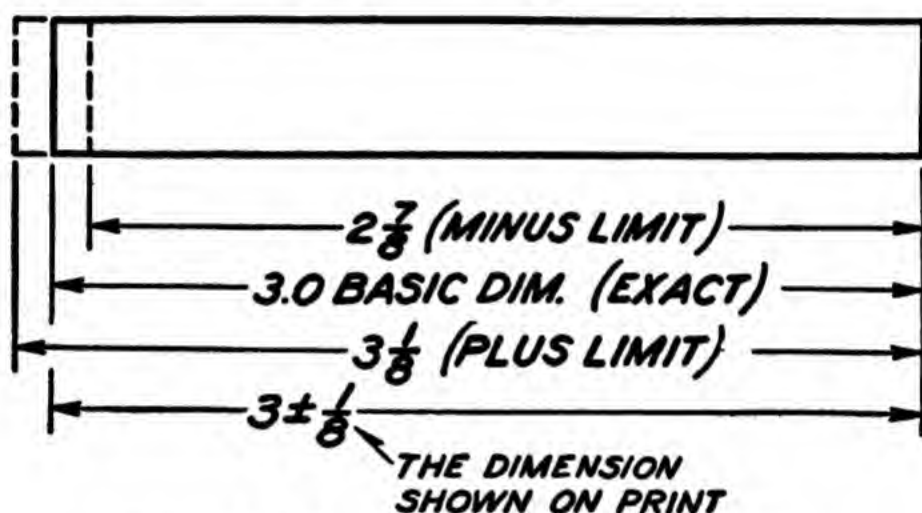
Basic dimension, limits, and tolerance.
